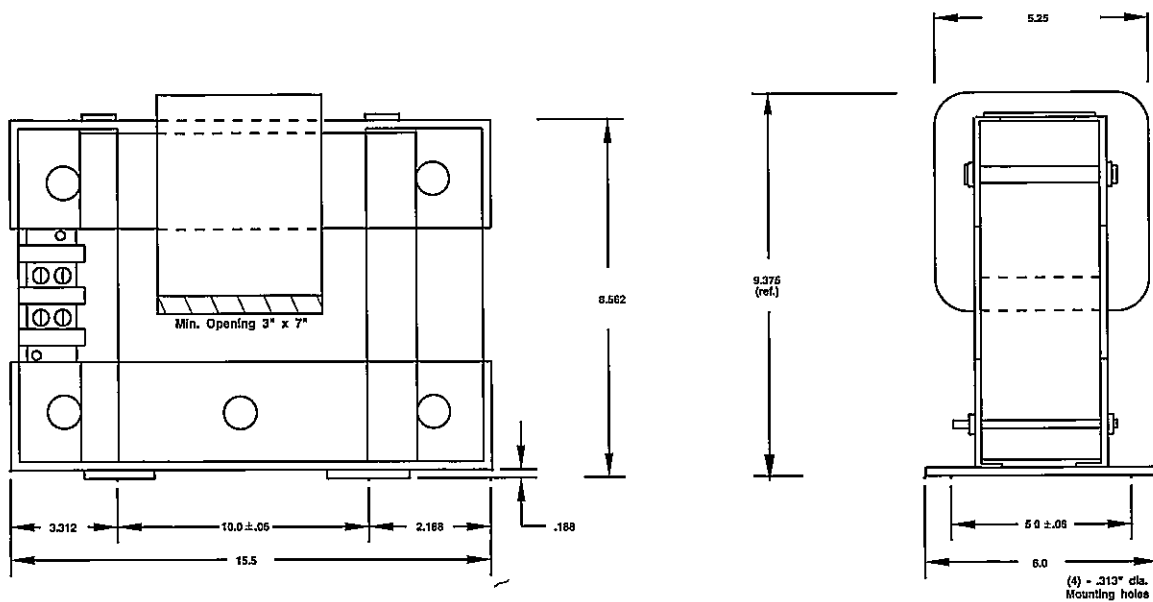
OUTLINE DRAWING BE 25929-001.
